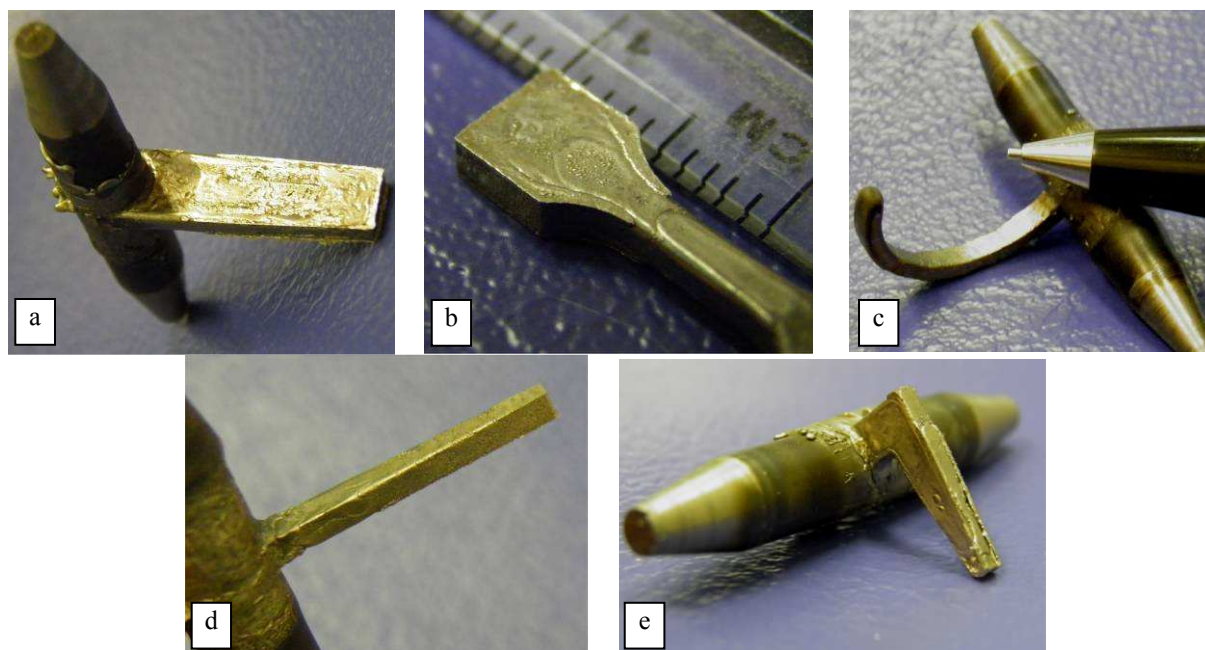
Shapes of products produced by mini-thixoforming from the CPM 15V steel: a) cuboid, b) miniature tension test specimen, c) curved cuboid d) pyramid frustum, e) ECAP channel shape (L-shape)
